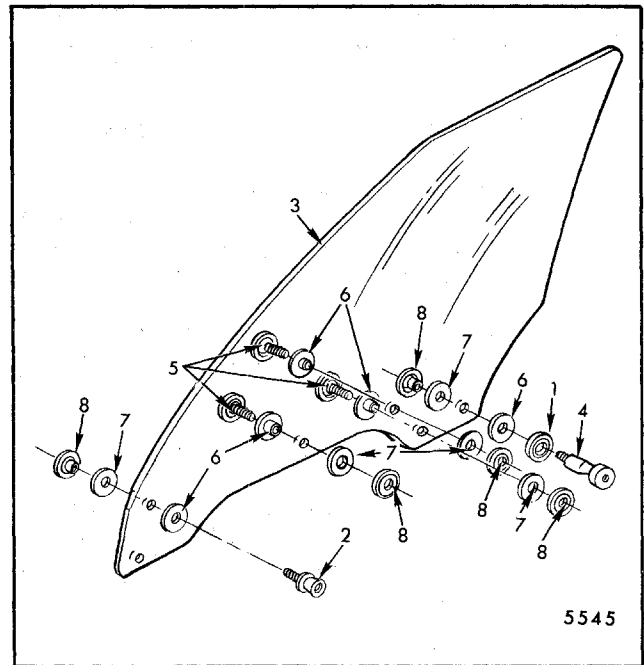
Front Door Window Assembly - "A-29,35" Styles
